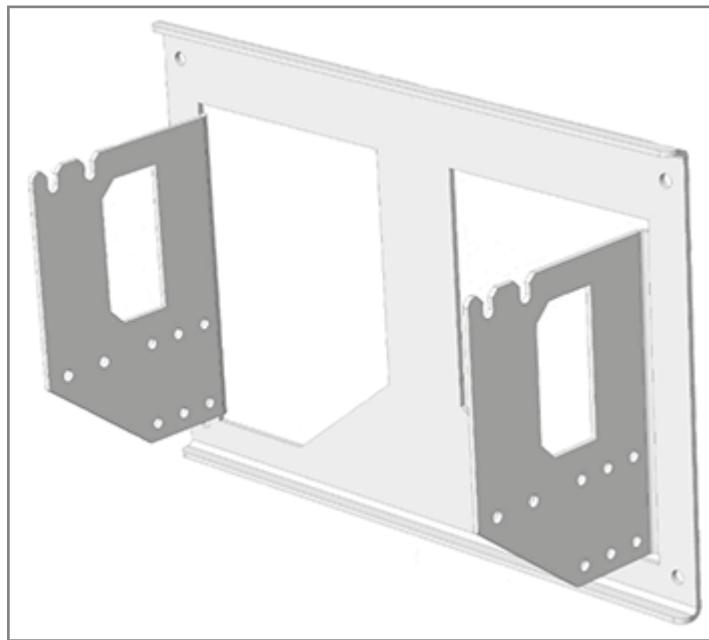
Two CAP Ls Back-to-Back in a Dual Mounting Bracket
